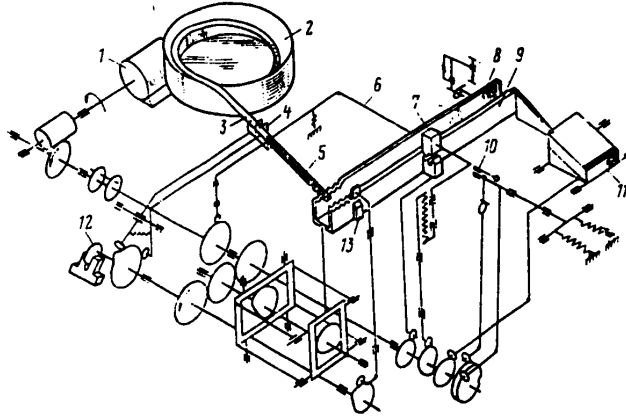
Kinematic schematic of the automated needle welding and forming unit.
